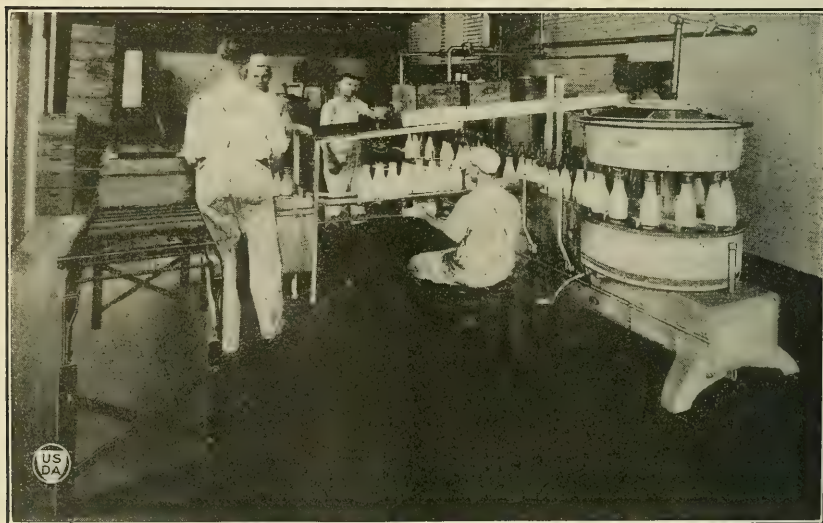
Bottling milk with automatic rotary-type machine. At 31 plants using this type of machine the average number of bottles filled and capped per man-hour was 701.
